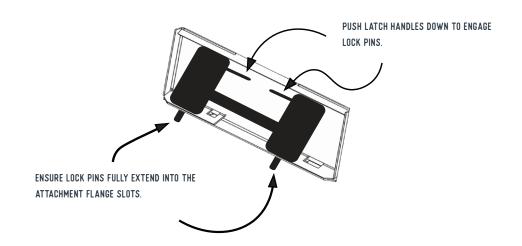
B QUICK ATTACH MECHANISM LOCKED TO ATTACHMENT PLATE
